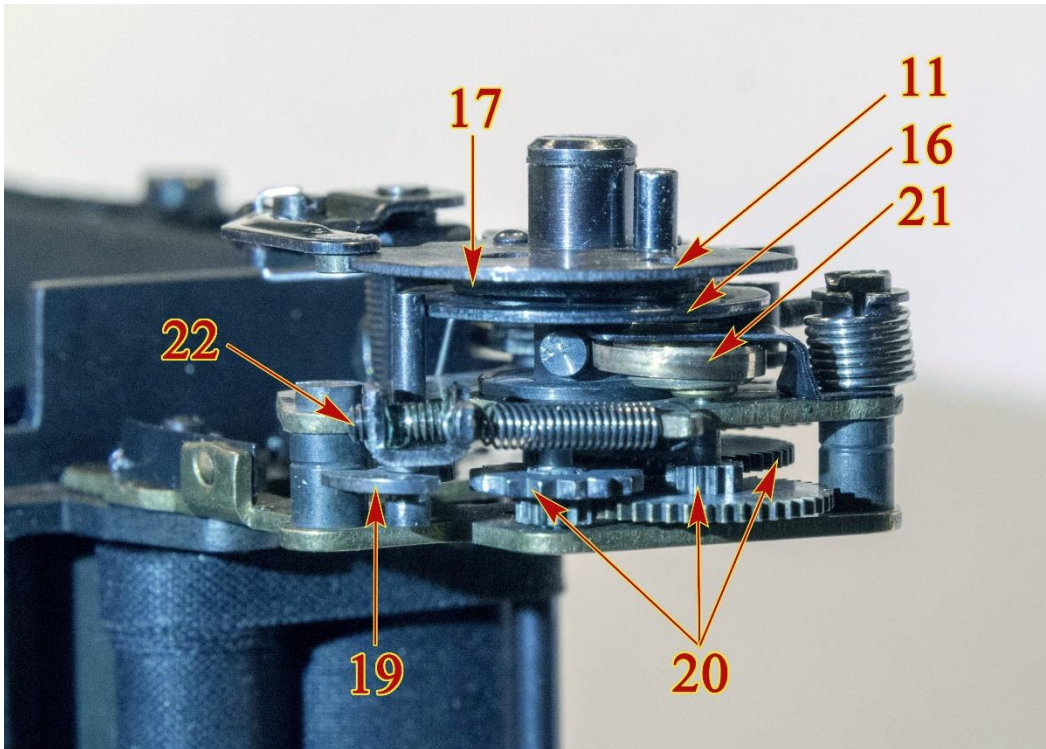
View of time machine of Pentacon six from the gear wheels, anchor and flat coil (clock) spring side
